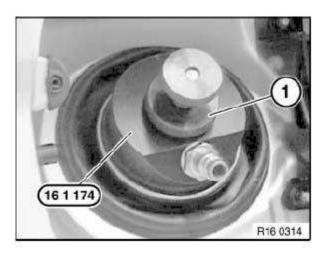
Wheel And Special Tool (16 1 174) Courtesy of BMW OF NORTH AMERICA, INC.
